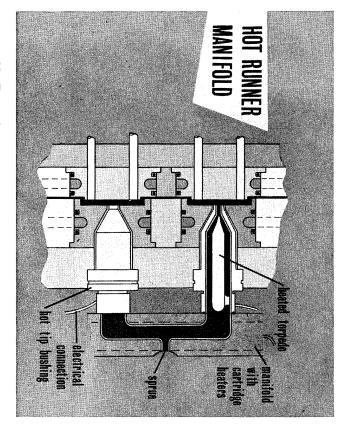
Typical Hot Runner Manifold and Hot Tip Bushing Design
